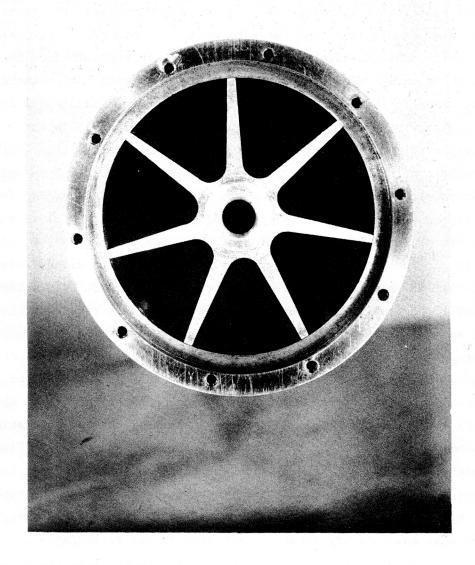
Photograph of tubular rotor with end cap removed, showing the "spider" baffle in place. The vapor enters the axial channel through a large number of uniformly spaced small holes (not shown) connecting the sector-shaped compartments with the axial channel.
